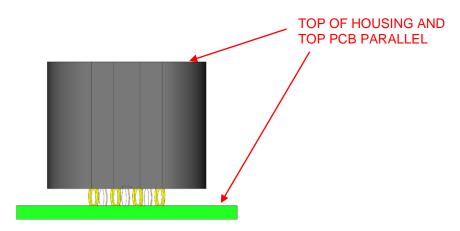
Connector Parallel to Top of PCB and EONs Aligned
